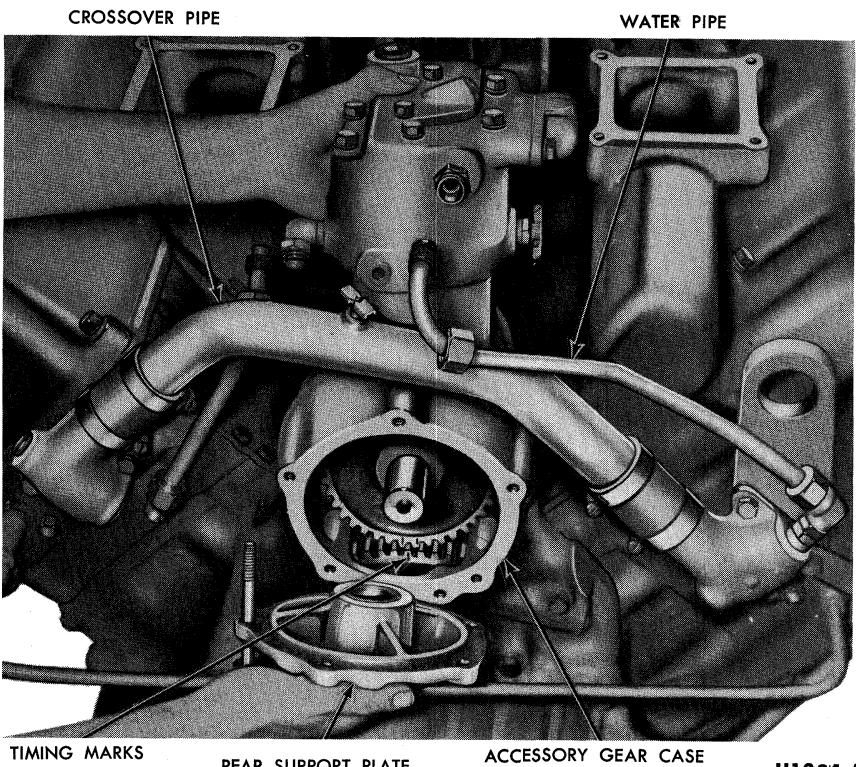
Removing or Installing V-6 Air Compressor—H-Series Typical of F-, T-, and N-Series
